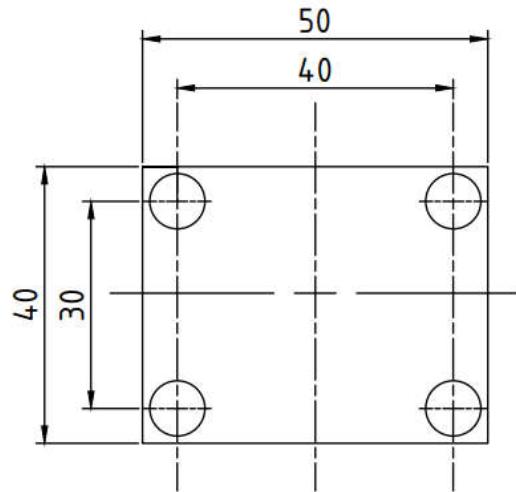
Mechanism's shaft's housing joint bolt group dimension
